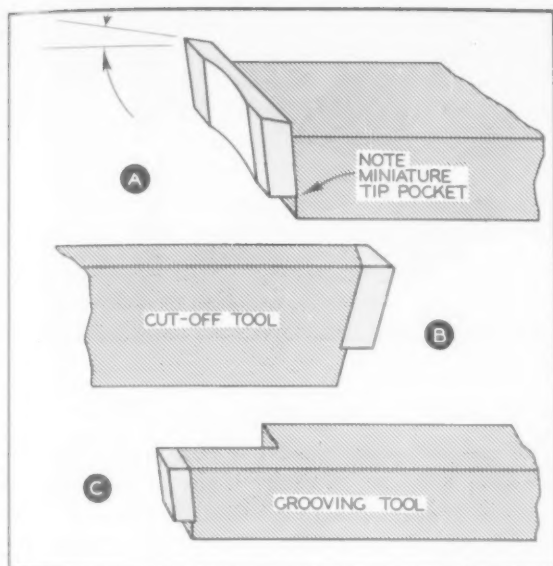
Butt brazing the carbide on the front of the tool shank.
